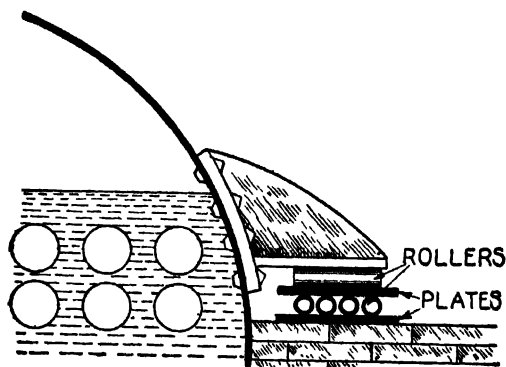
,387.—Approved method of providing for expansion on lug supported boilers. The two sets of rollers placed at right angles to each other form a universal joint, allowing free movement both endwise or crosswise.
